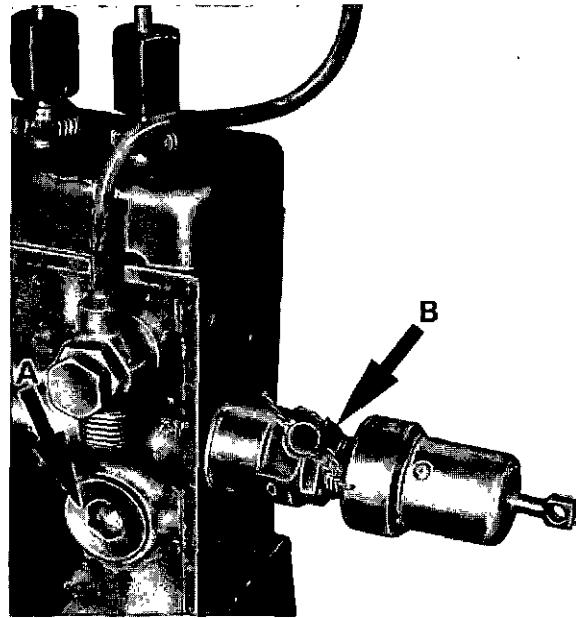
Tappet access plug 'A'. Rack stop locknut 'B'.
